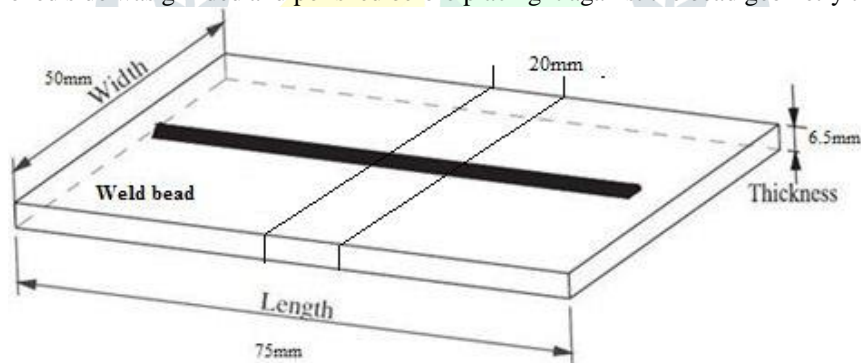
Pattern used to take specimens from welded plates
